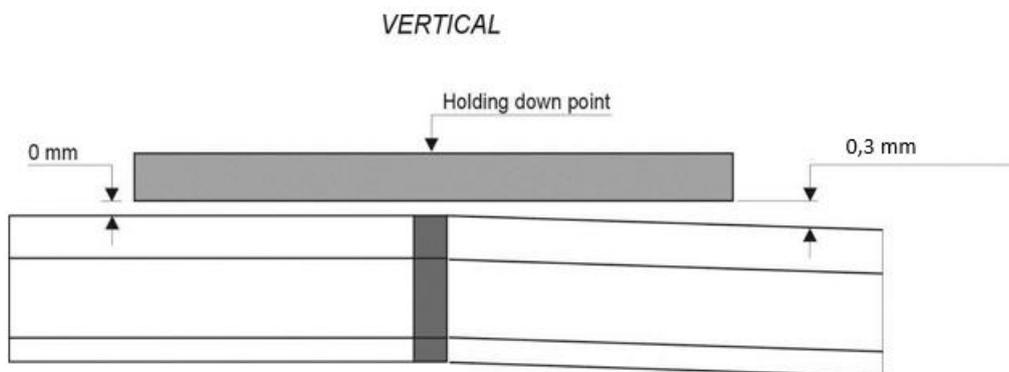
Measurement of Straightness of flash butt joints after press and grinding using a 1m straight edge
